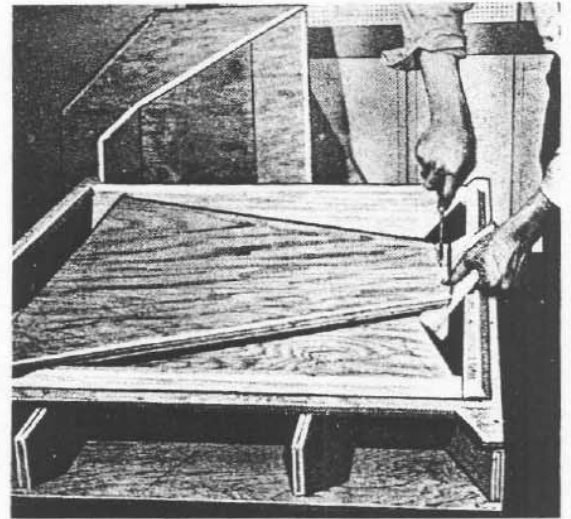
Screw parts 5, 6, 7 together for a "Dry Fit" check before gluing.
